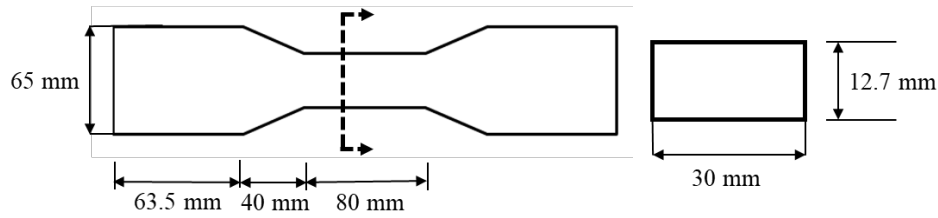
Dimension of the dogbone-shape specimens for the uniaxial tension test.
